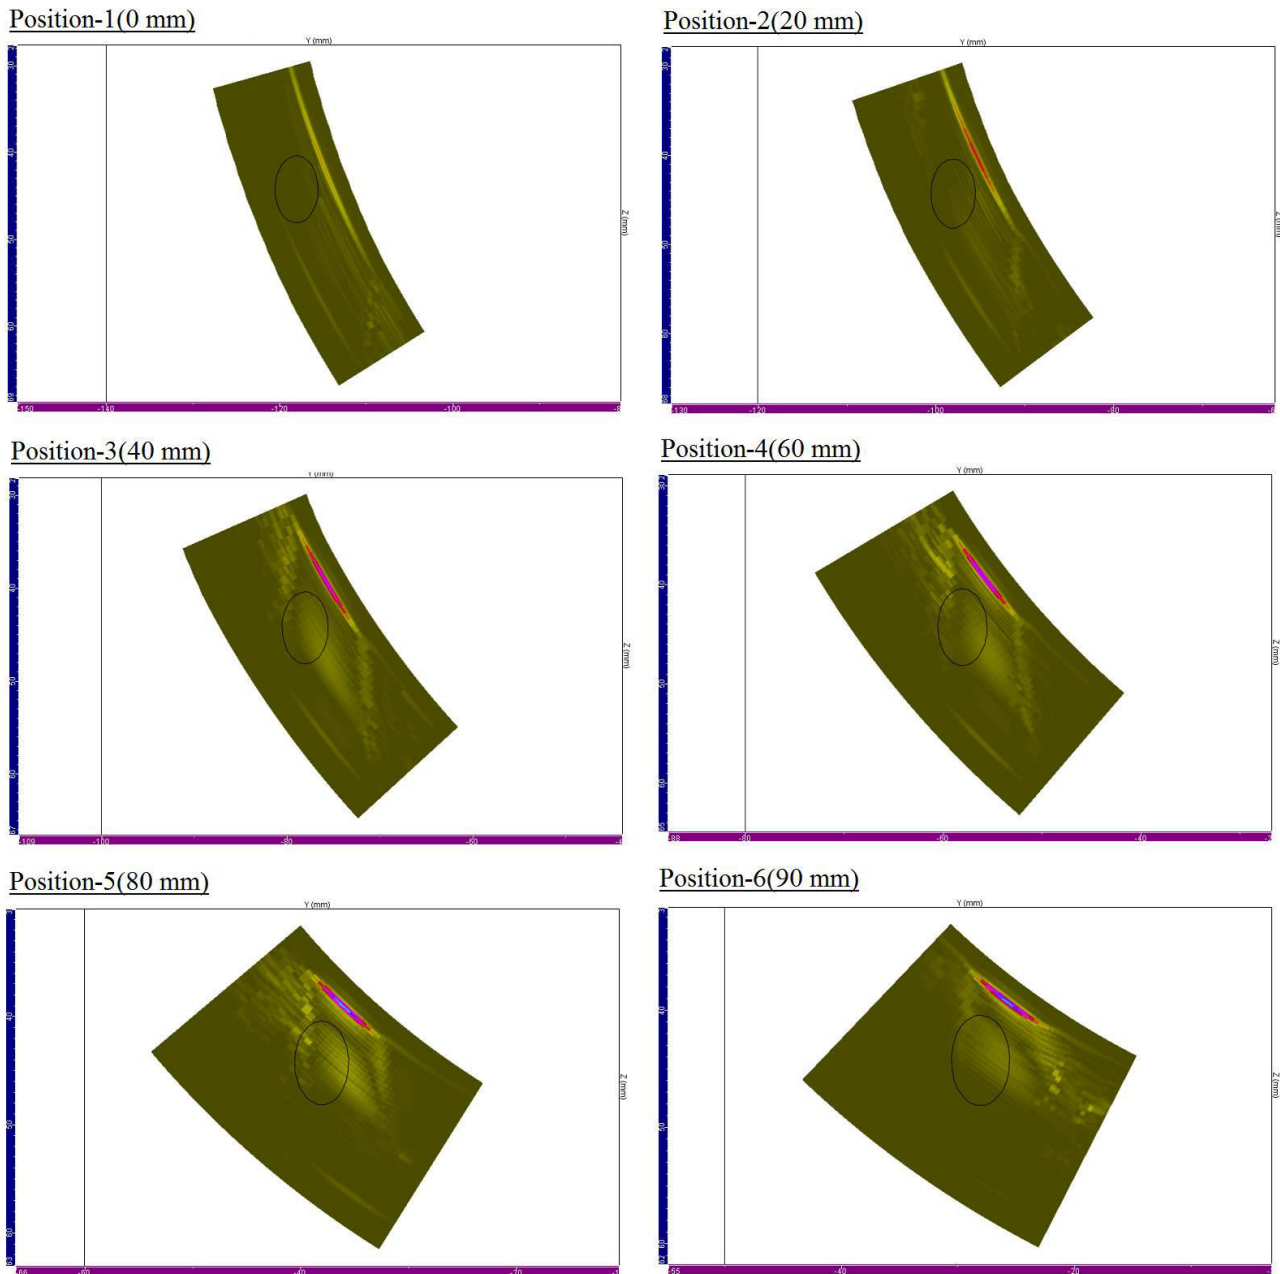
Calibrated S-scan results at each wedge position when inspecting defect-2
